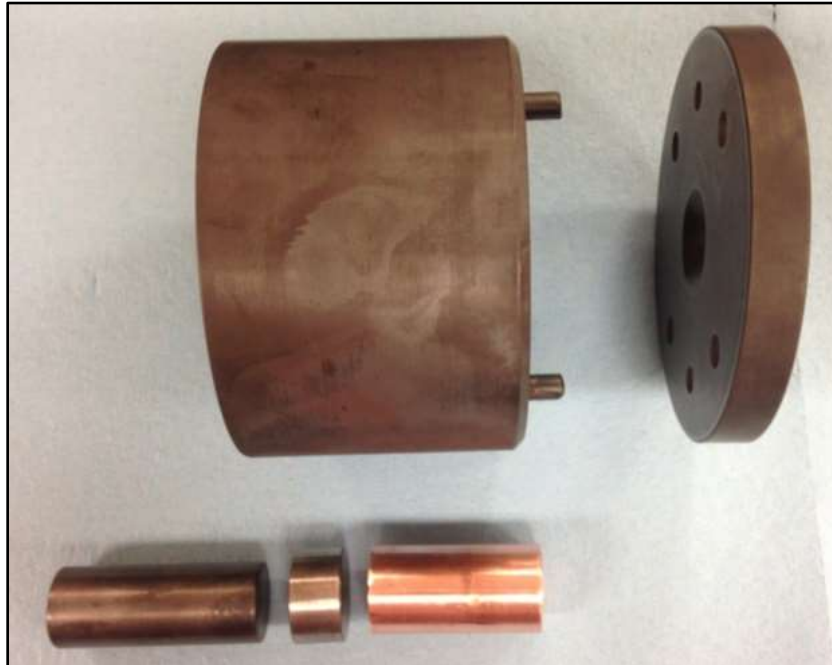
Extrusion tooling and billet for copper rod test 2
